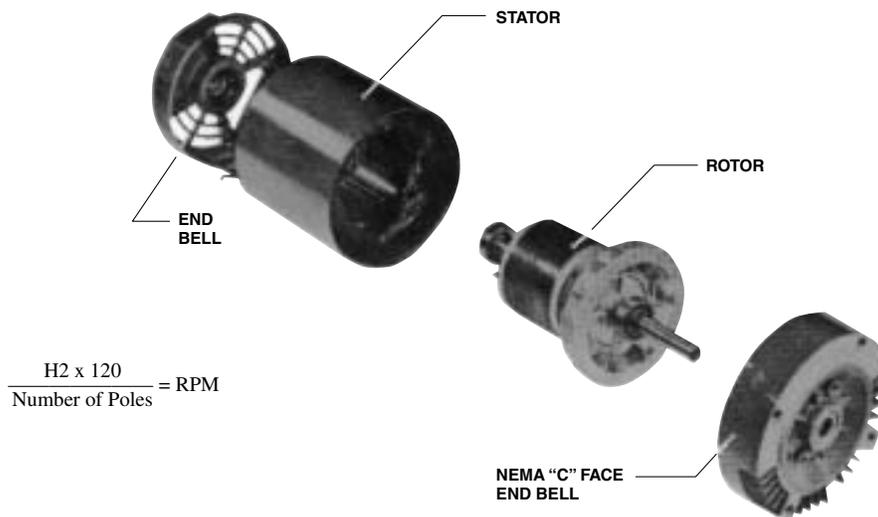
, Exploded View, AC C-Face-Mounted Motor
